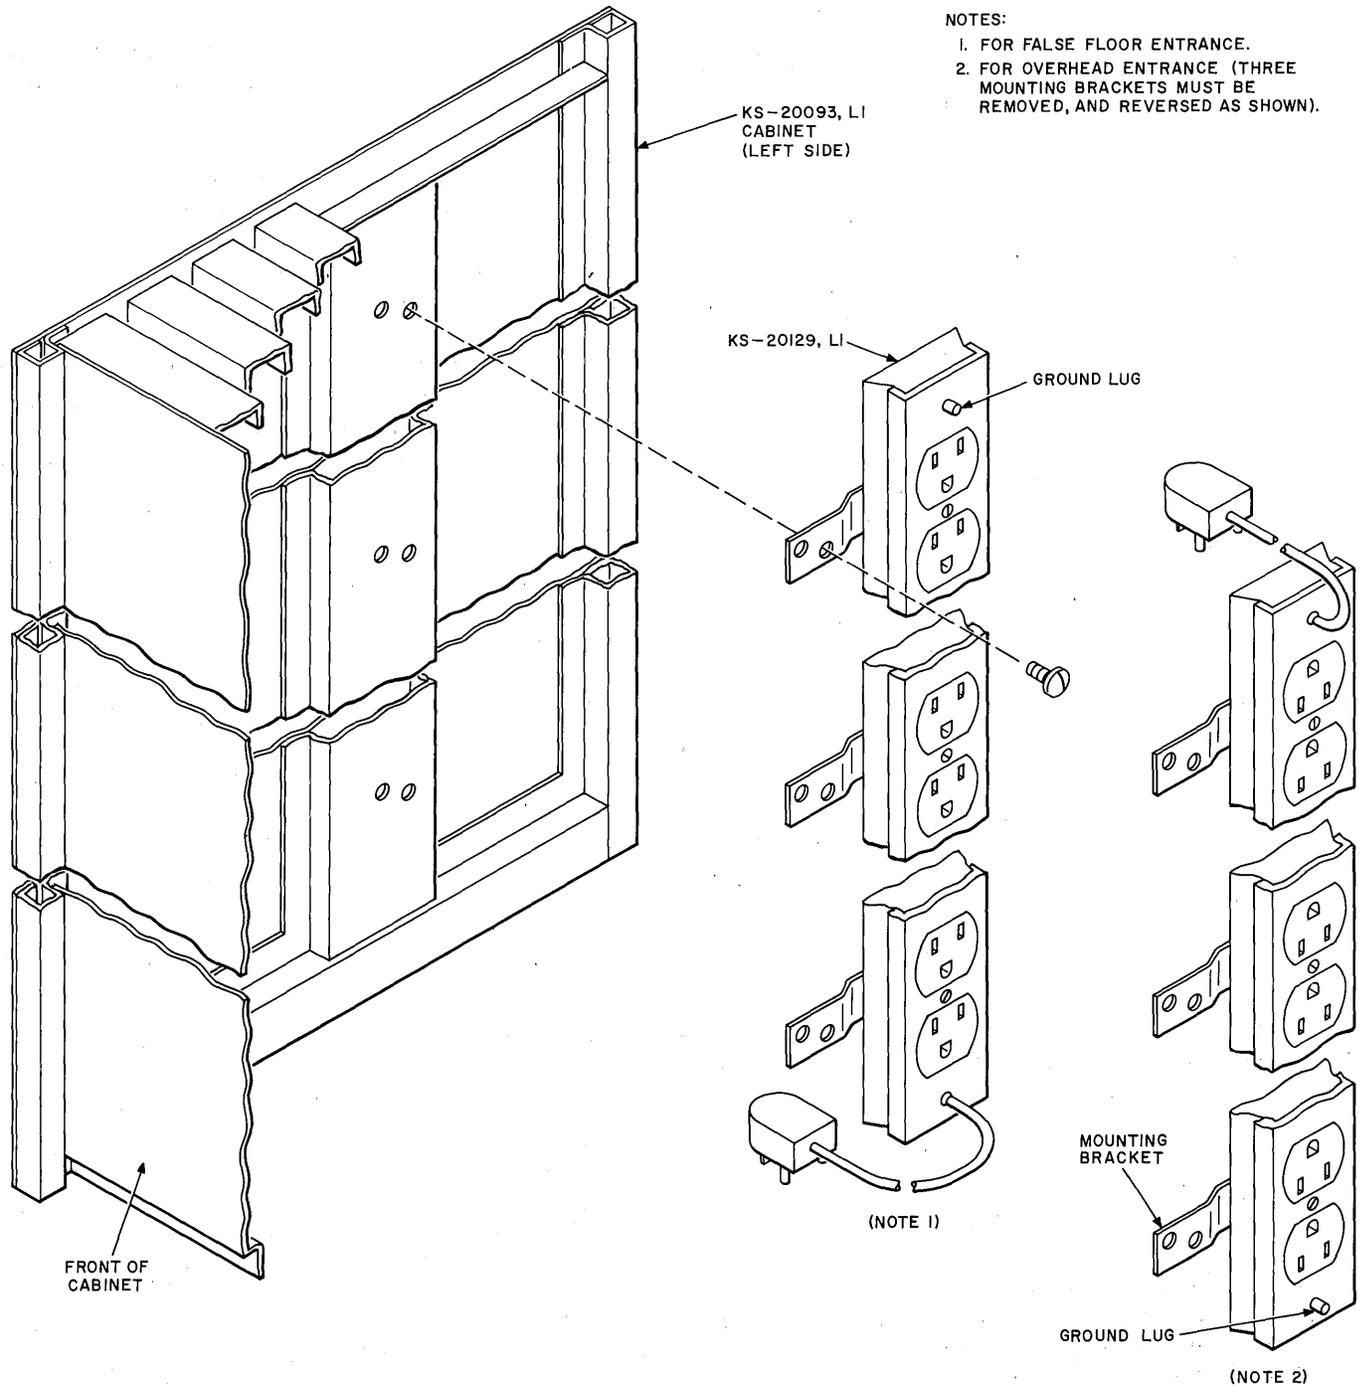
Installation of KS-20129 L1 Power Strip on Left Side of Cabinet
